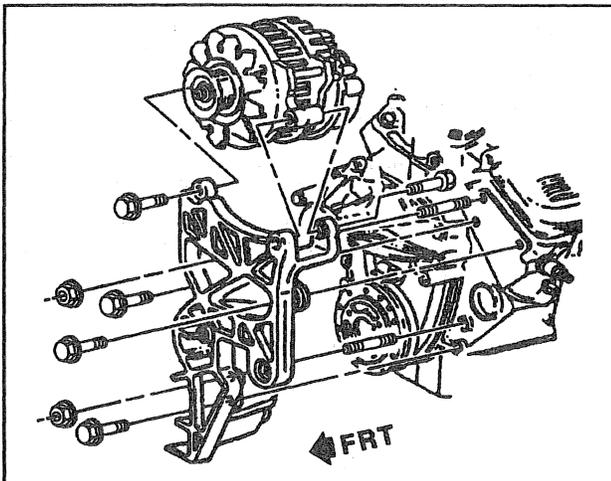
Generator Mounting (4.3L, 5.0L, and 5.7L Engines)
